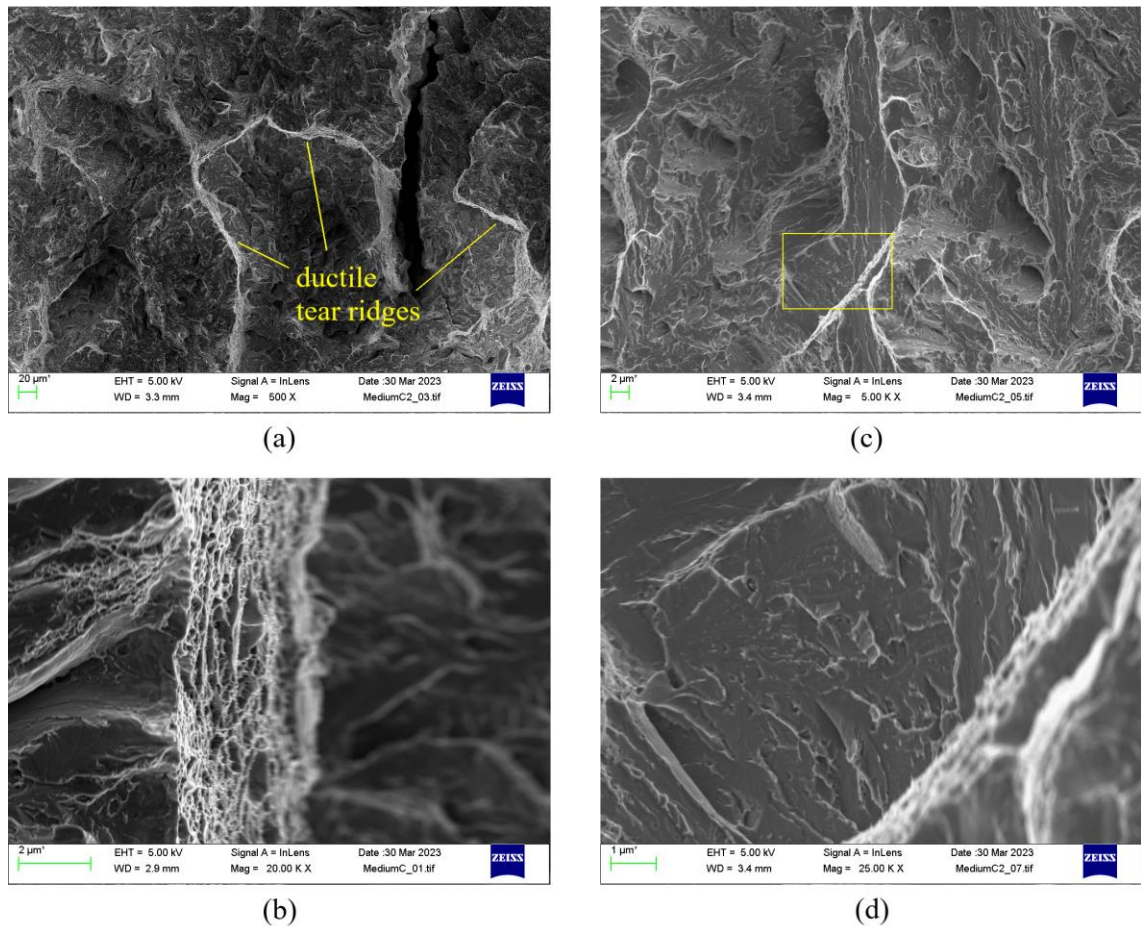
Brittle and ductile features on fracture surfaces of medium-carbon steel, a) mostly brittle surface with ductile tear ridges, b) closer view of a ductile tear ridge, c) closer view of the brittle fracture surface showing mostly cleavage facets, but also small ductile regions, and d) close-up of one of the facets in the highlighted area in c) showing ductile dimples on the facets.
